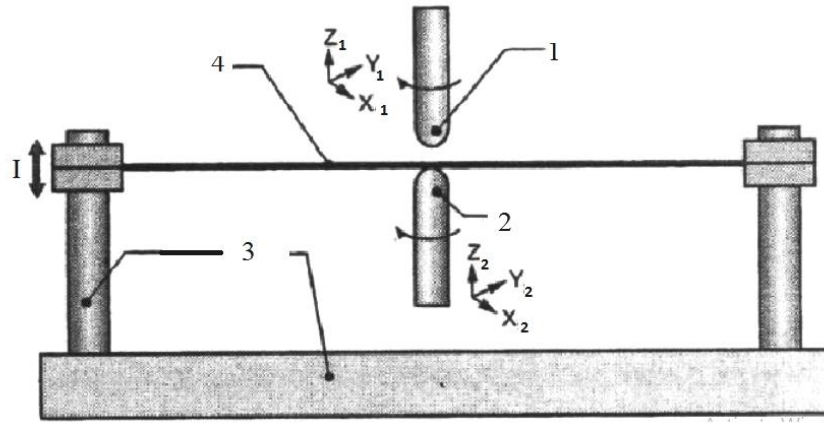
Schematic representation of incremental forming with counter tool, [13]: 1 – main tool; 2 – auxiliary tool; 3 – semi-finished fixing device; 4 - semi-finished product; I – the penetration movement of the tool in the direction of the Z axis
